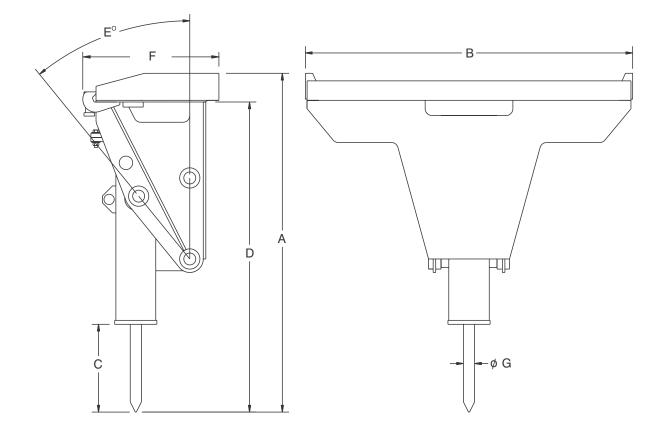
Typical Street Hammer Dimension Drawing Shown with 2-Position Skid Steer Mounting Configuration
